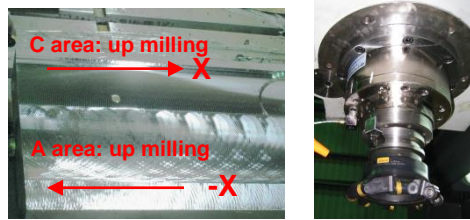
Tool marks generated on the work-piece are from the tool itself and two different feed directions.
